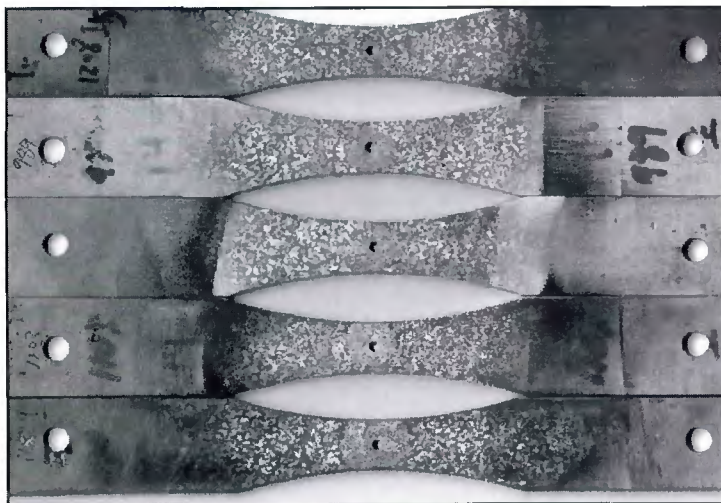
Fatigue test specimens of GTA welding repaired D357 alloy. A stress-concentration hole is located at the center of the weld. Specimens were etched after fatigue testing to show the location of welds and the grain size.
